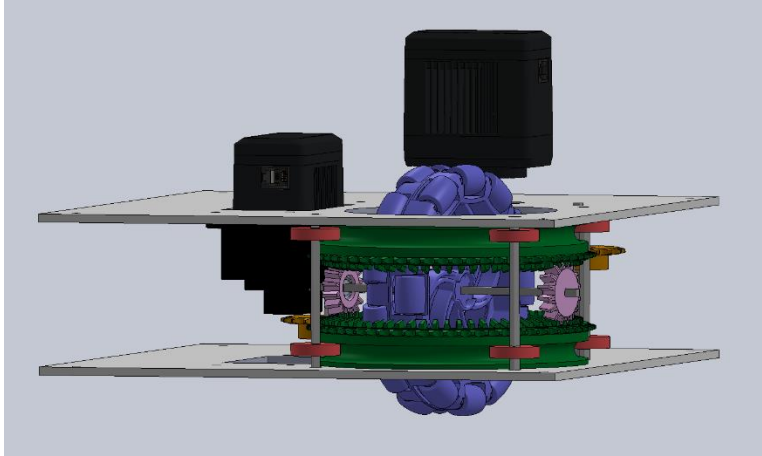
CAD model of the final swerve drivetrain assembly, to be used in virtual testing.
